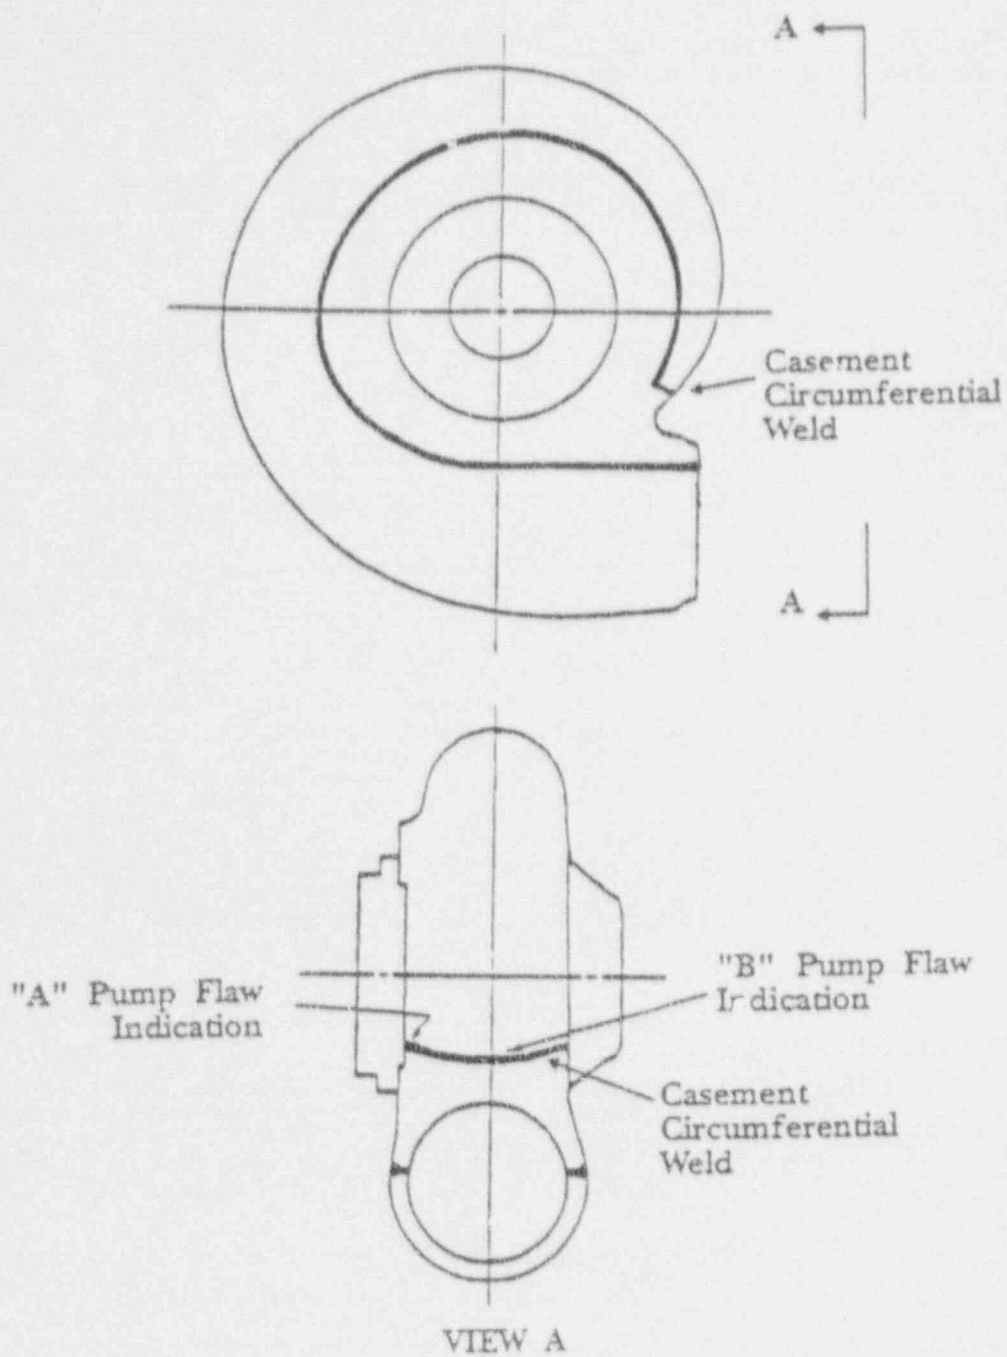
Schematic Drawing of Weld Flaws in Arkansas Nuclear One "A" and "B" Reactor Coolant Pumps, Unit 1
